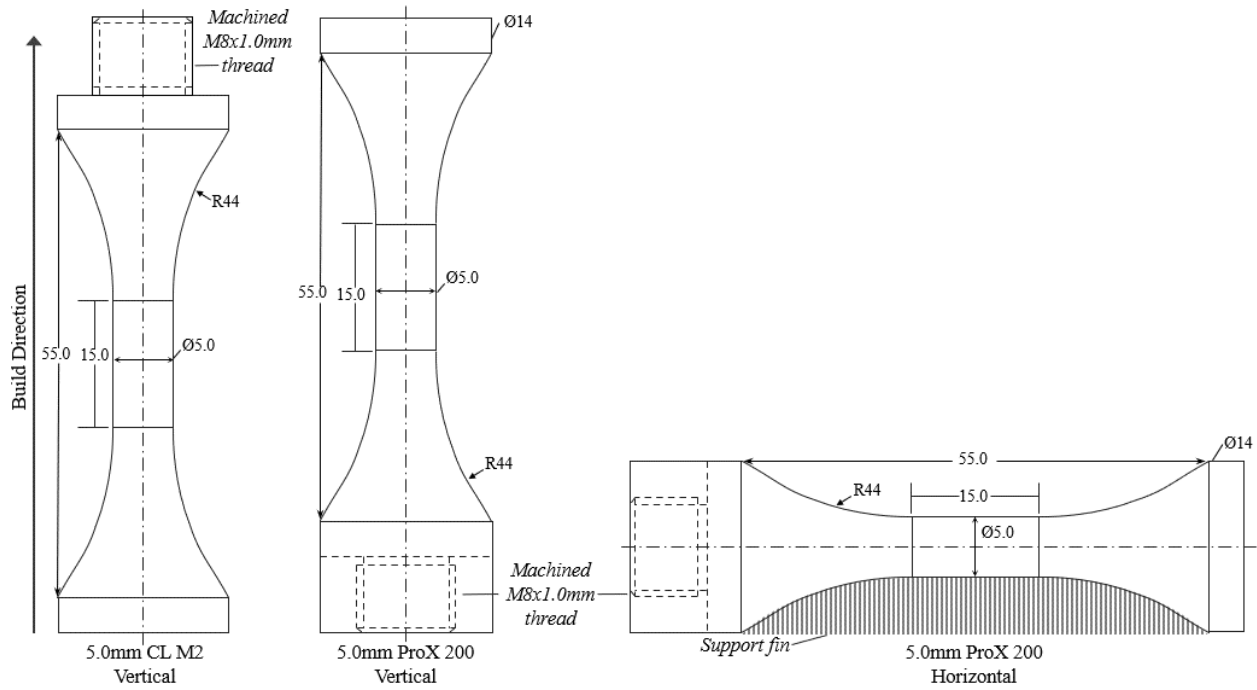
As-printed specimen geometry for 5.0 mm diameter dog-bone ultrasonic fatigue tests. Solid lines represent as-printed geometry while dashed lines represent final specimen geometry after machine threading.
